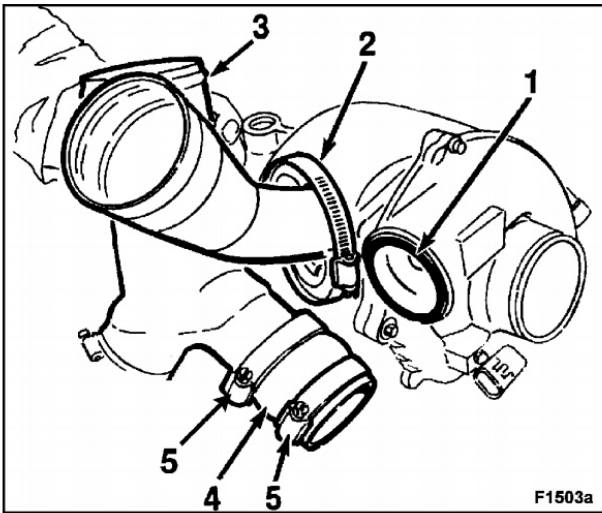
Installing the Charge Air Cooling Tube/Crossover Pipe Assembly
